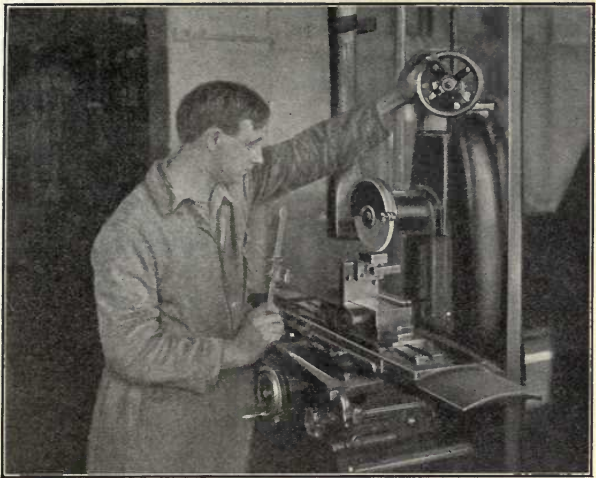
Guarded wheel on a Brown & Sharpe surface grinder.
